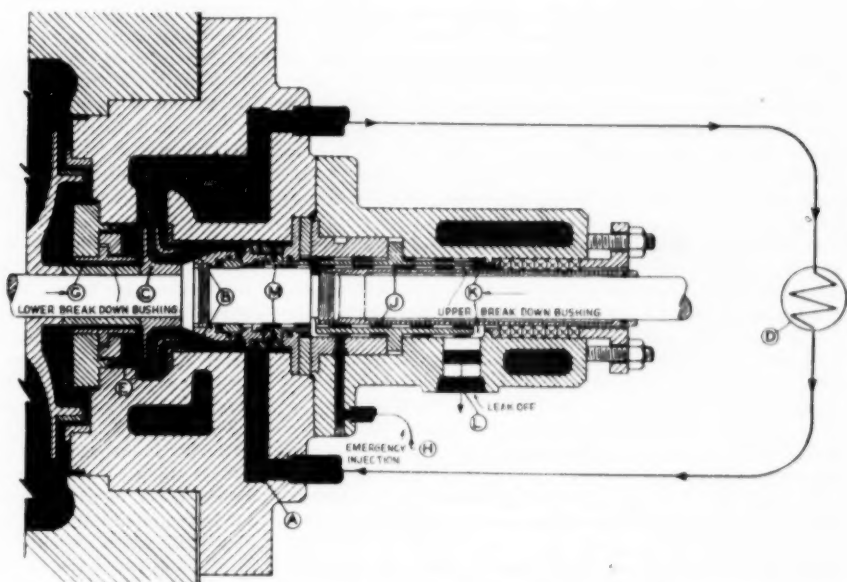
CROSS SECTION OF BOILER CIRCULATING PUMP
